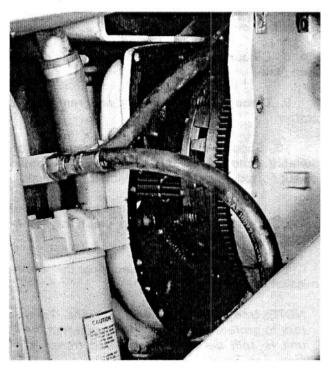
RIGHT-HAND VIEW OF I.R. TRANSMISSION "SPLIT" FROM ENGINE
